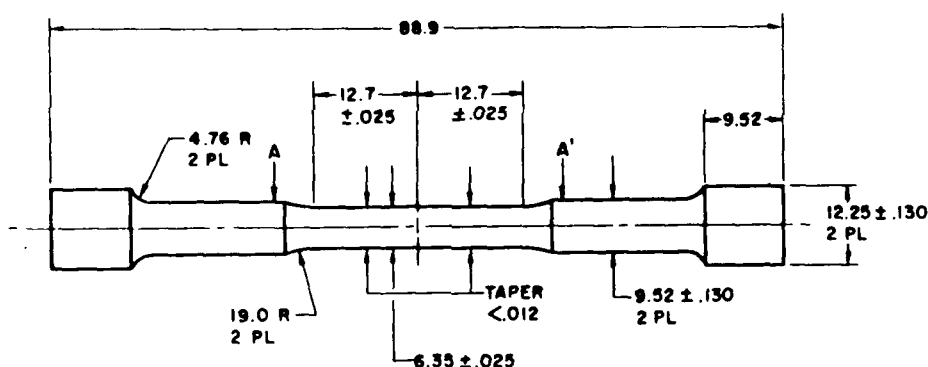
Dimensions of a round tensile sample (in millimeters).
